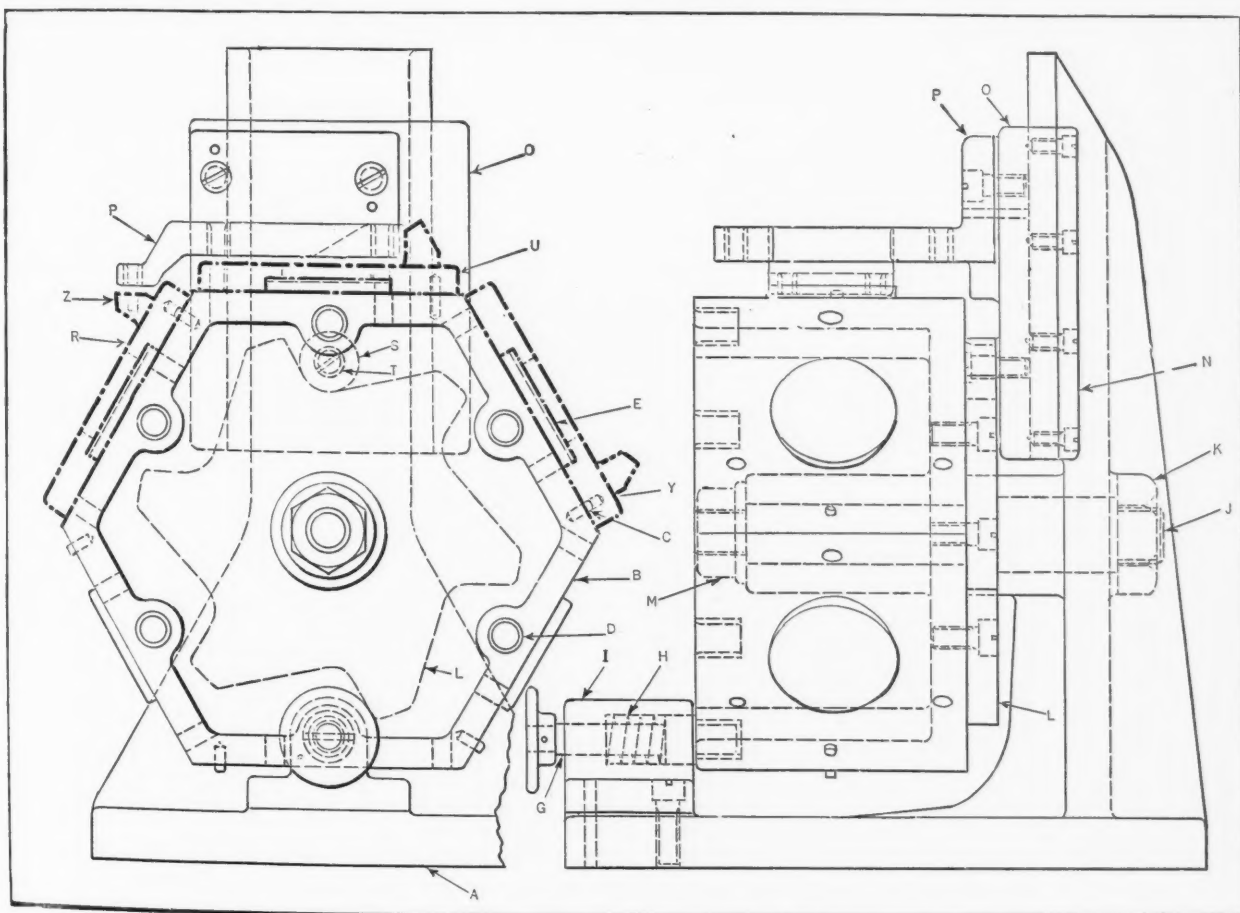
Indexing Fixture Designed for Use on Multiple-spindle Drilling Machine
